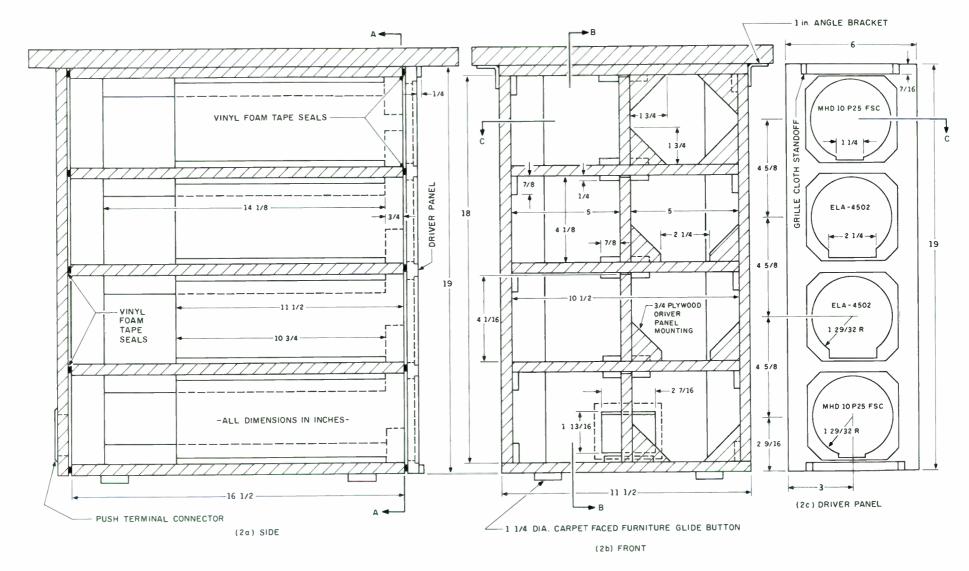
Basic construction details: a, side view, with push terminal connector; b, front view shows driver panel mounting; c shows driver panel with $1^{29}/_{32}$ inch radius cutouts.
